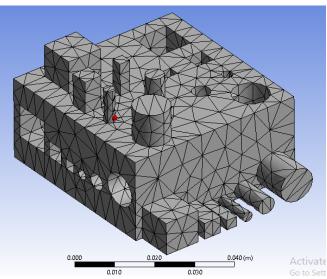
Tesselated Test Specimen (Tolerance Gauge) 3D model
